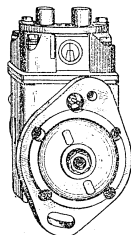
Alignment of the Large Gear Painted Tooth with the Mark on the Celluloid Inspection Hole of the M-10 Magneto.
